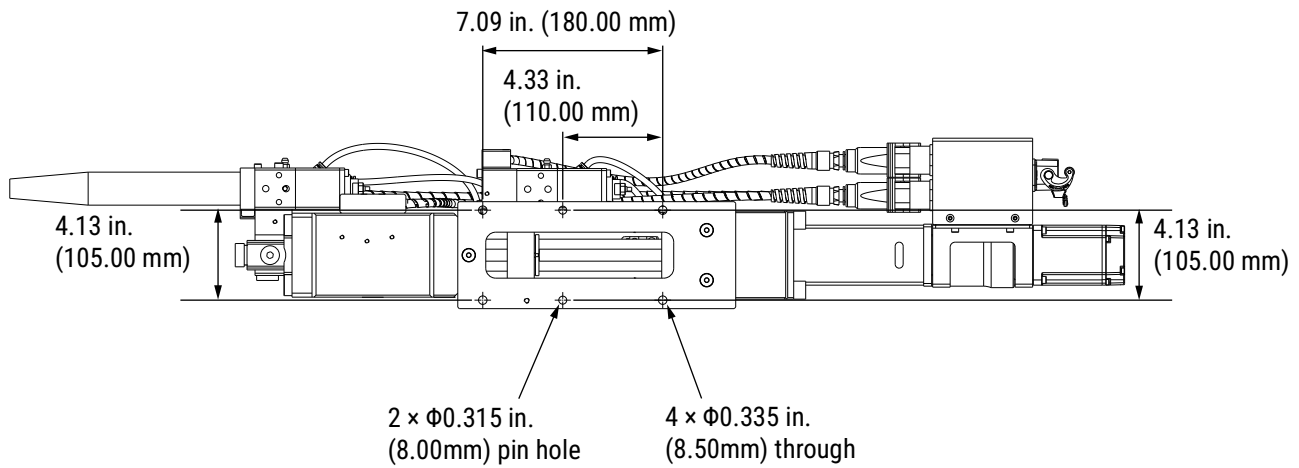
Mounting Hole Dimensions for Installing the PSM Warm Melt Metering Unit - 200cc
